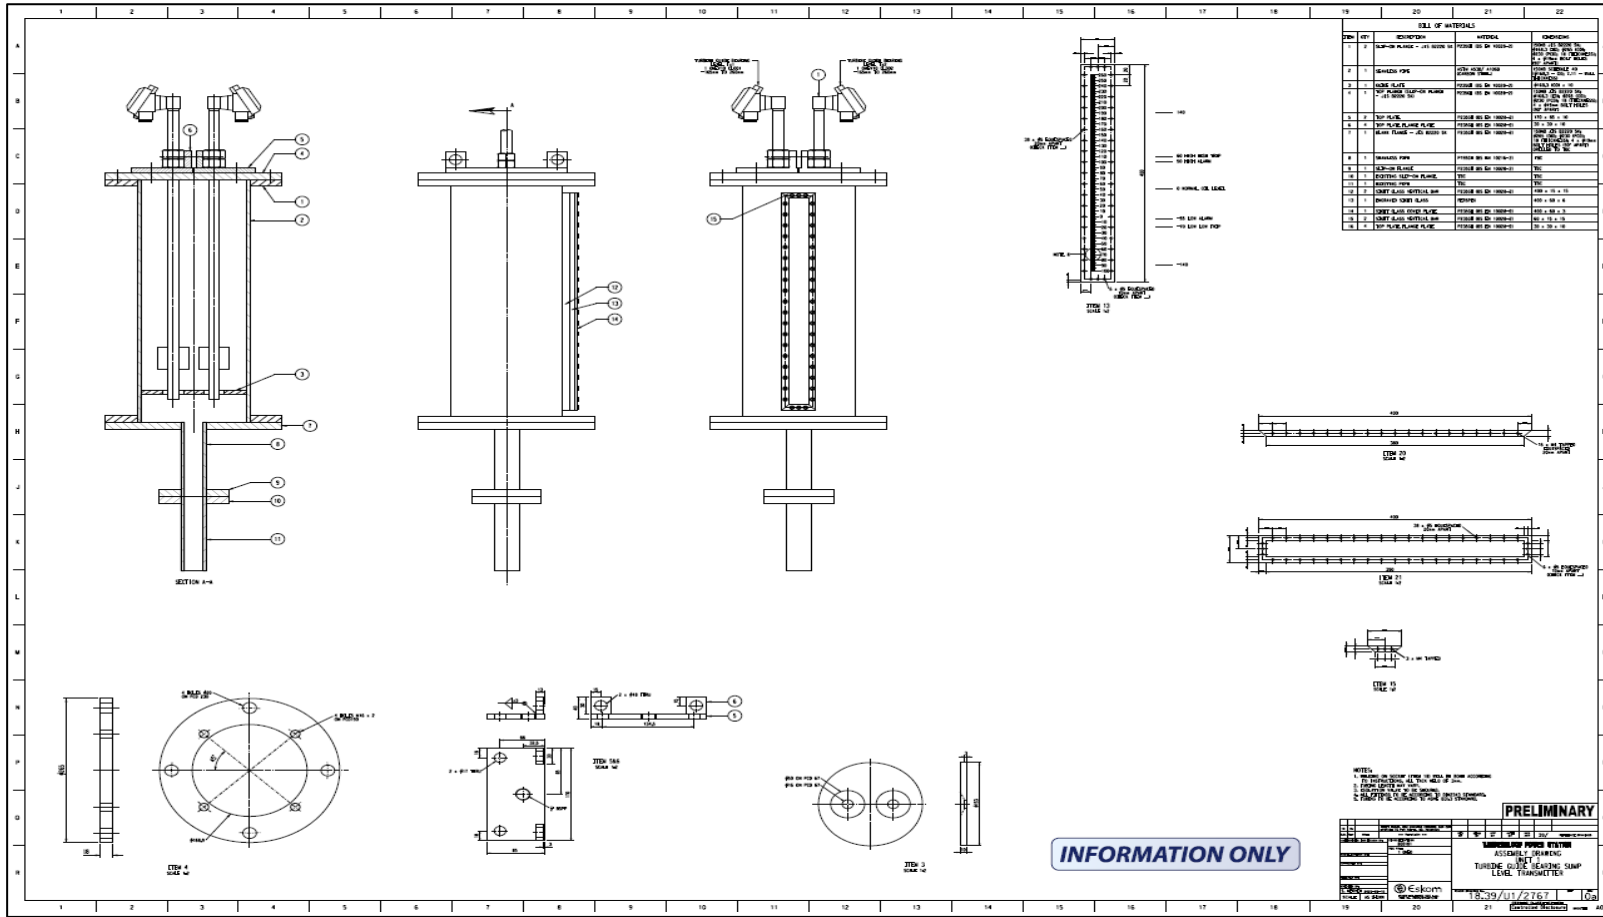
Assembly Drawing Level Transmitter Chamber for Oil Sump
